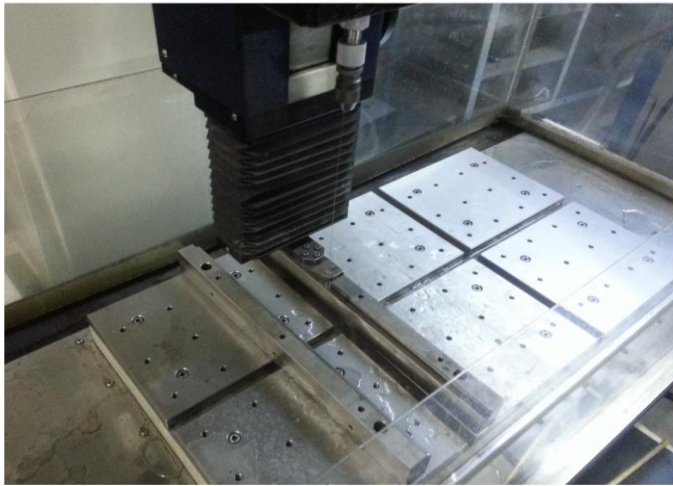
Photograph of deep hole electrical discharge drilling machine
